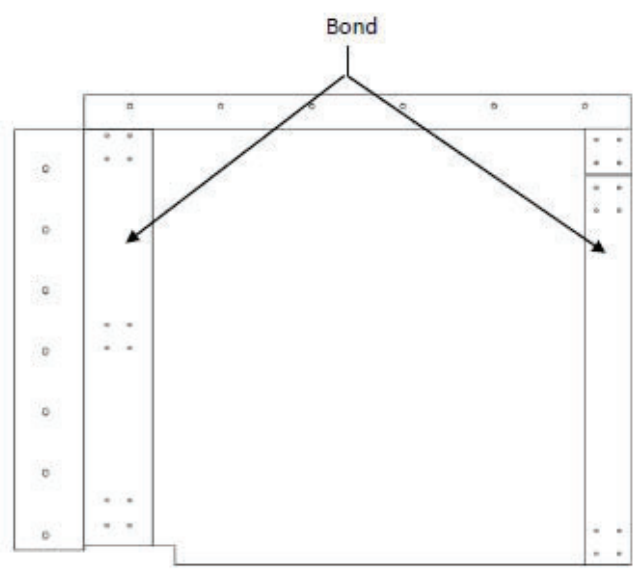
Front view – Adhesive Bonding of the Barrier continued
